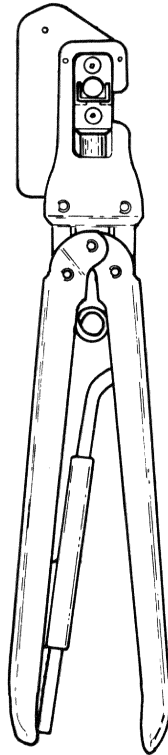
DIGITAL 29-24667 Coaxial Cable Cutter
